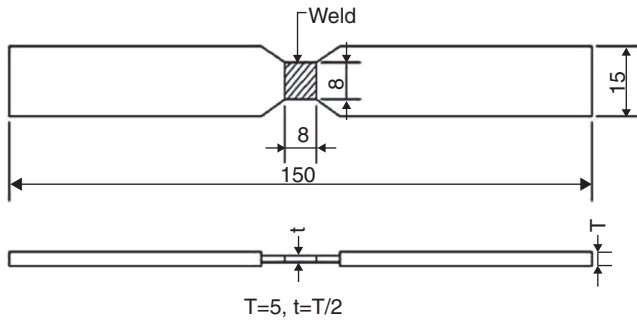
Configuration of tensile test specimen (all dimensions in ‘mm’).
